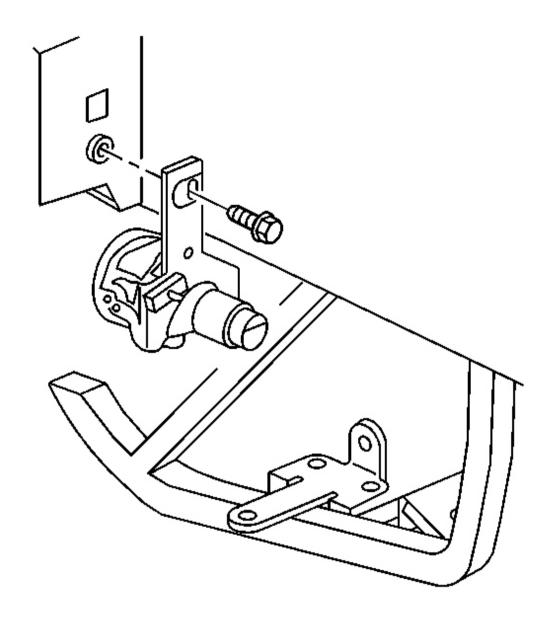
Front Fog Lamp To Front Bumper Impact Bar Courtesy of GENERAL MOTORS CORP.
